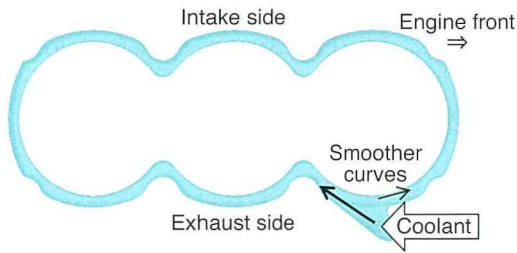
Top View of Cylinder Block Water Jacket in New Engine
